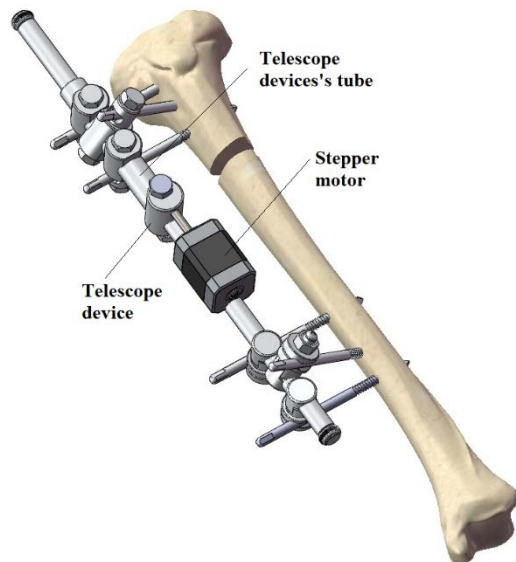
Mitkovic external fixator for lengthening of lower limbs with installed stepper motor
